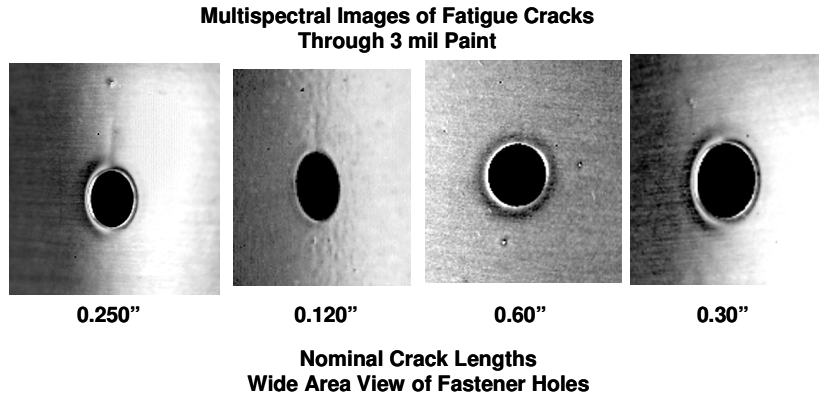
Detection limits of a fatigue crack produced in the laboratory by an MTS Fatigue Machine. Note crack varies from 0.250 in. to .030 in.
